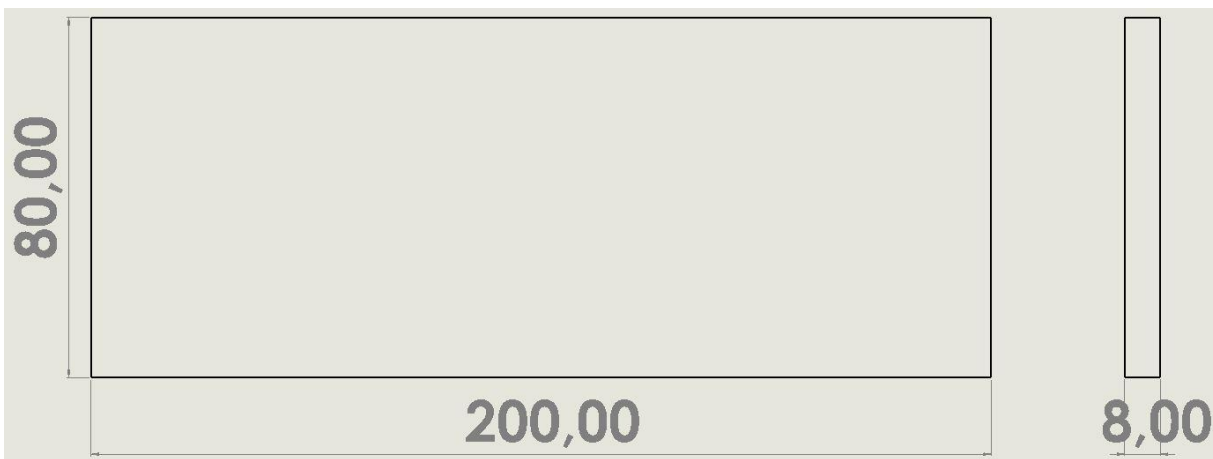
The dimensions of armor steel-1 and armor steel-2 ballistic test specimens in mm.
